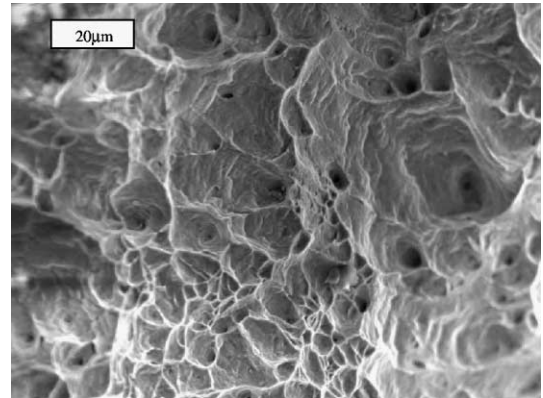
$T = 250\text{ °C}$ – ductile fracture with dimples.
